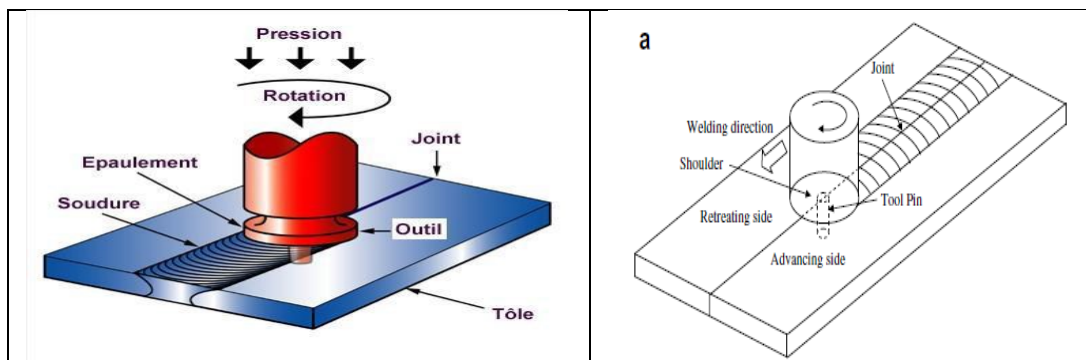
Friction Stir Welding Process [1a]
